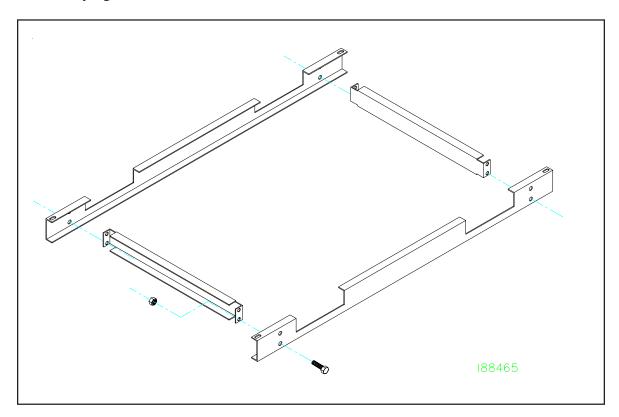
E - Dual-Stacked Boiler Adaptor Bracket
